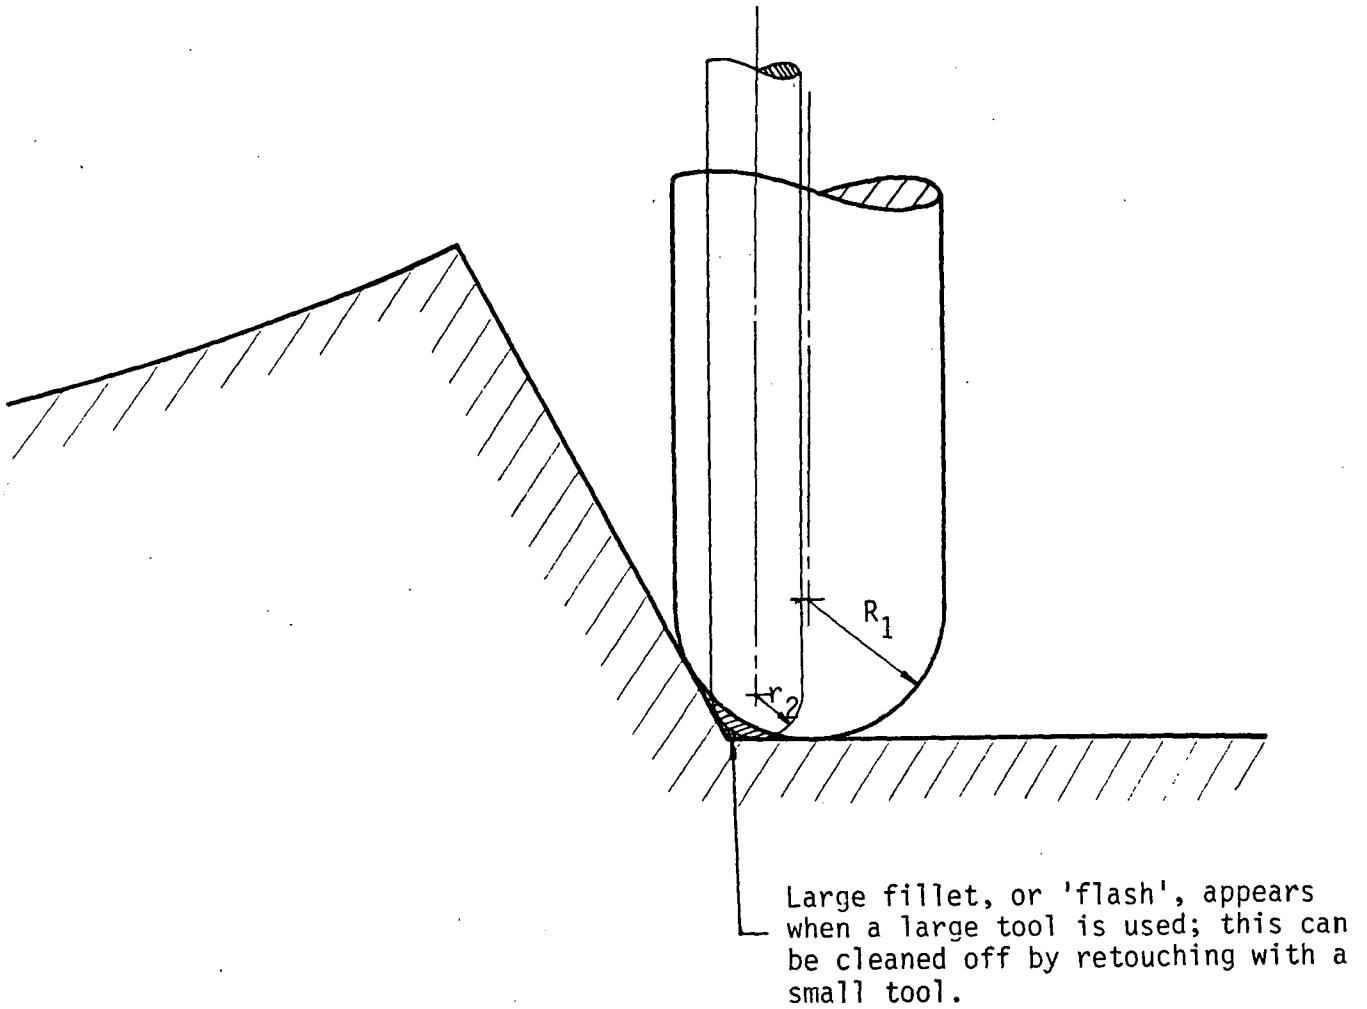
Machining upper cavity with a big tool results in large amount of flash at flash-line
